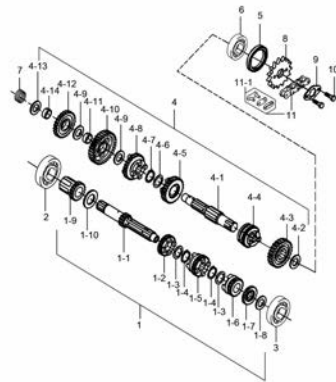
GEAR SHIFTING (P03-S160-0015)
